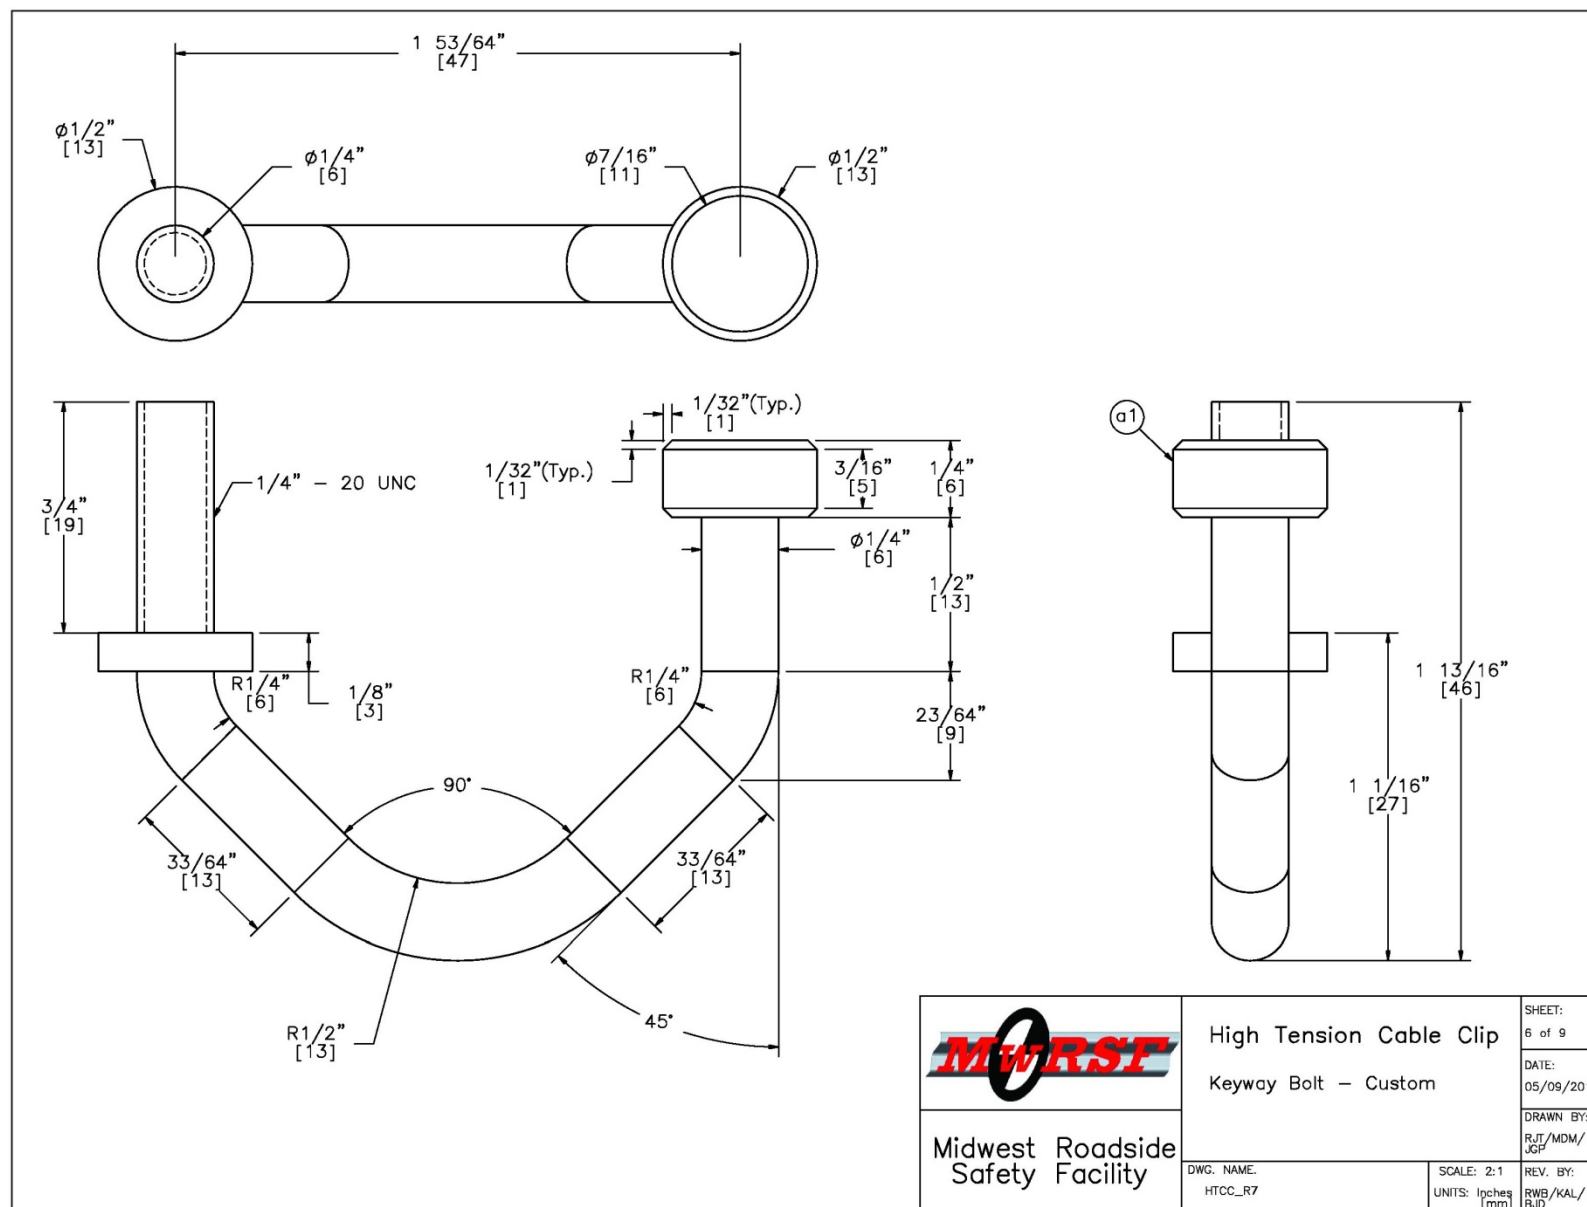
Keyway Bolt Detail, Post Assembly A, Test No. HTCC-1
